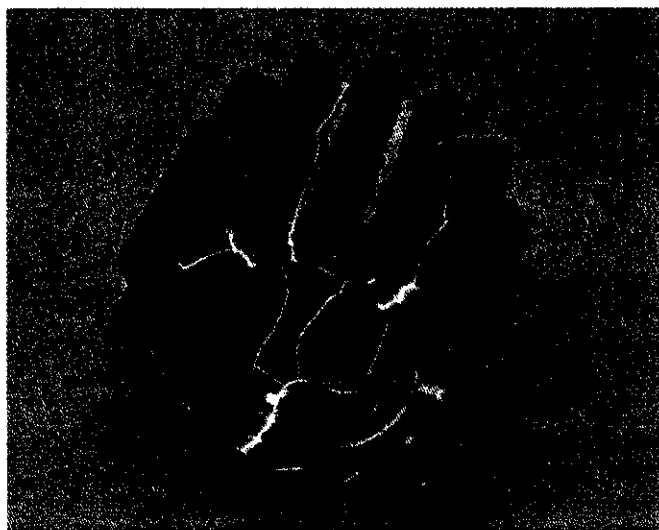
INDICATIONS OF SURFACE CRACKS
